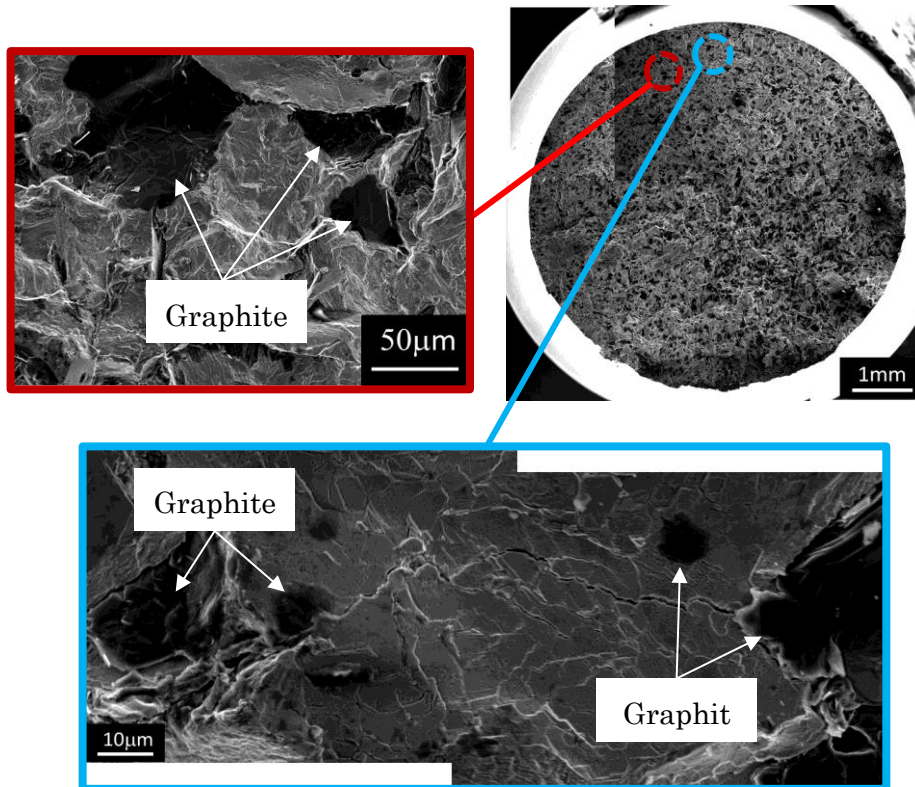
Fracture surface observation of a specimen tested in rotating bending fatigue test ($\sigma_a = 130\text{MPa}$, $N_f = 1.14 \times 10^6$ cycles).
